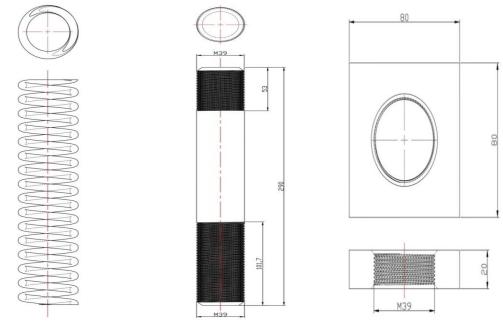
,16,17: Spring for deflection, spring holding pipe and spring holding nut
